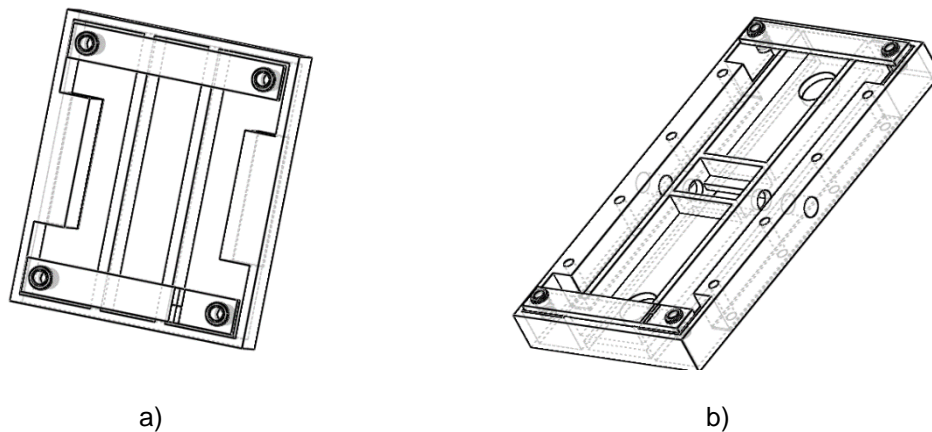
Force plate core and mounting apparatus. a) Upper limb measurements. b) Lower limb measurements.
